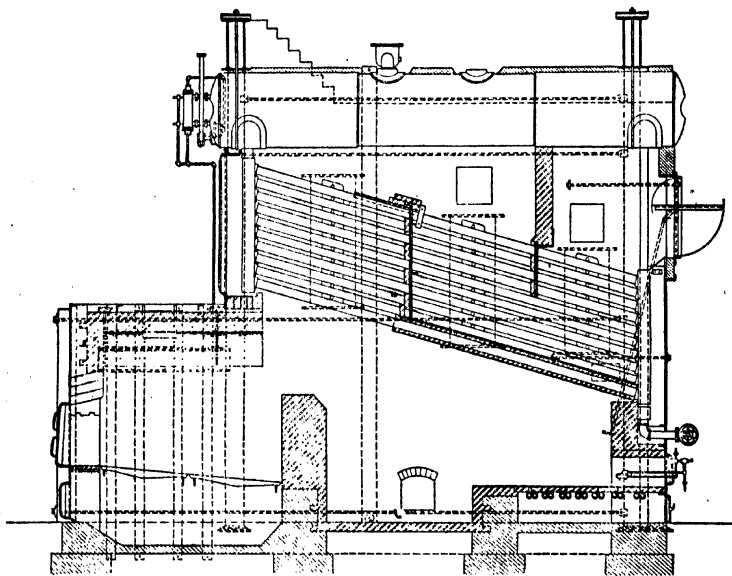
Babcock & Wilcox boiler with Dutch oven.
